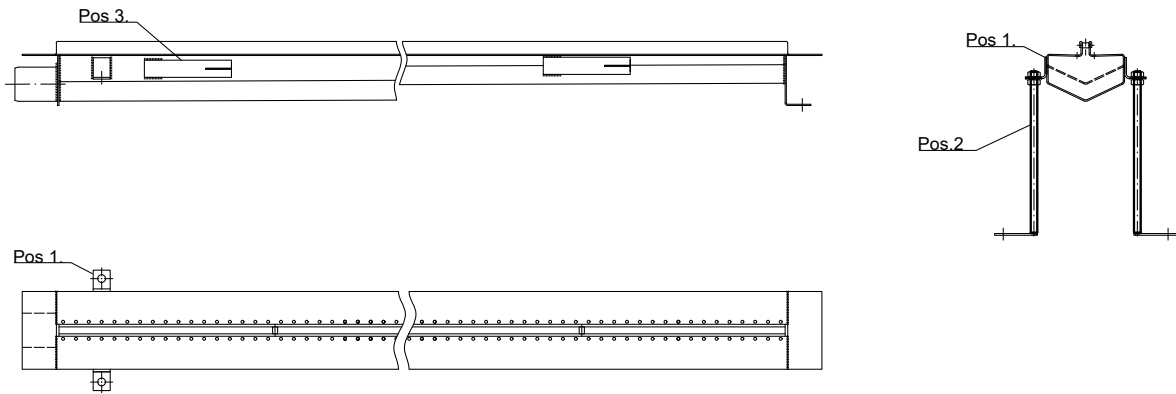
Positioning of the additional parts for SPA (Source: Own drawing)
